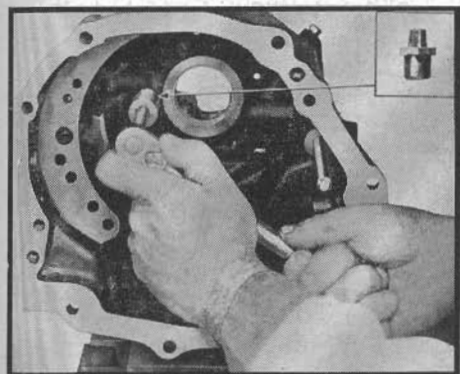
Removing lubrication pressure relief valve. 1953-59
